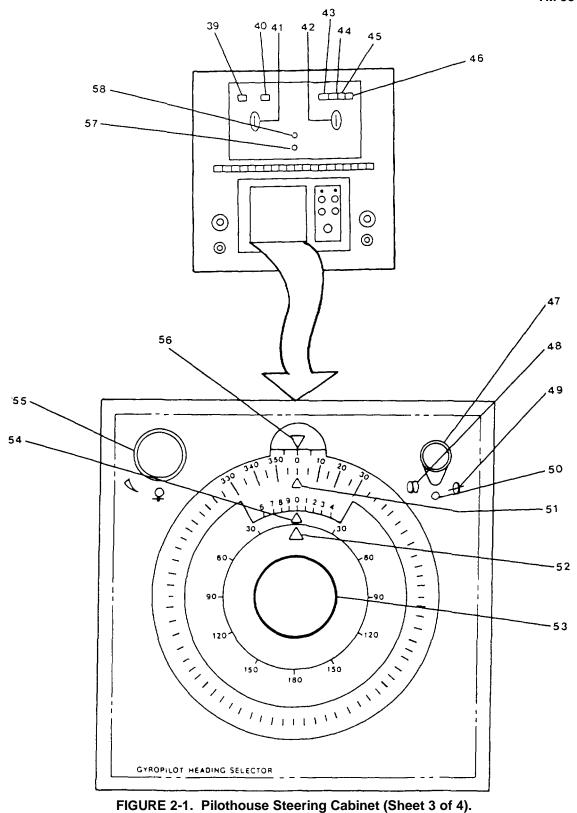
Pilothouse Steering Cabinet (Sheet 3 of 4).
